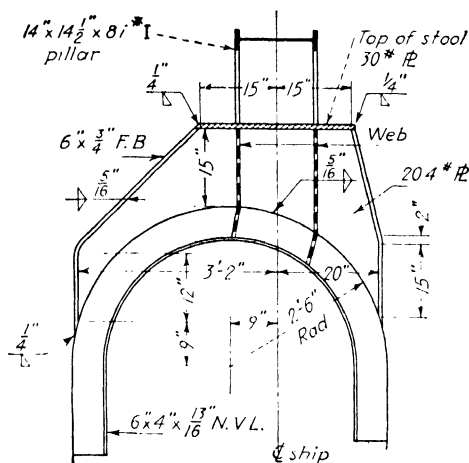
A stool fitted to the top of a shaft alley for the purpose of supporting the foot of a stanchion.
